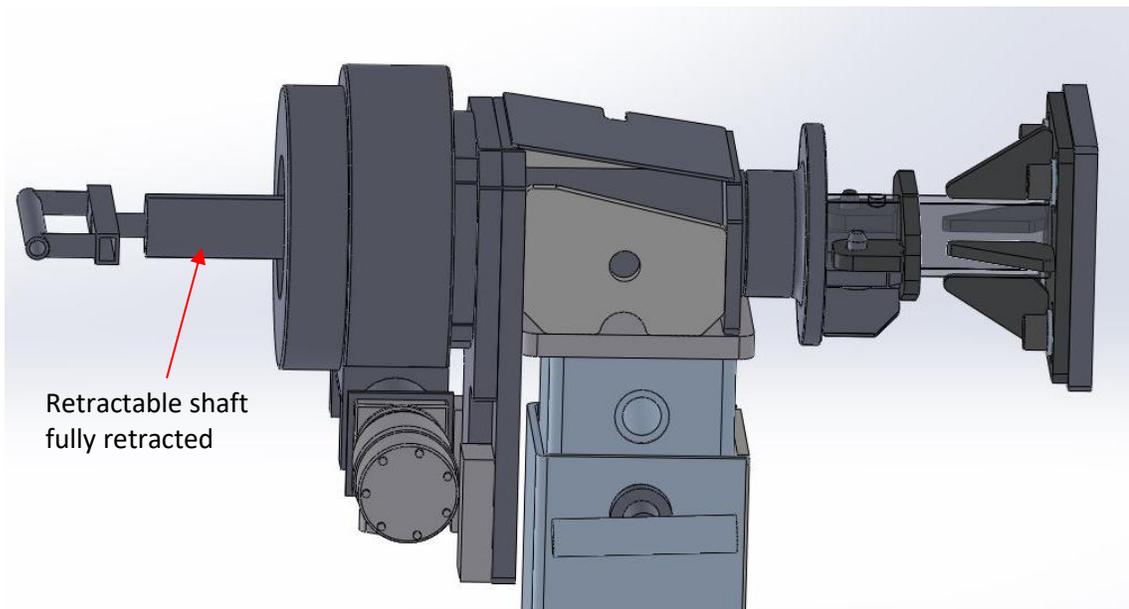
Drive End Iteration #1, Retractable Shaft Disengaged with Welding Fixture Yoke
